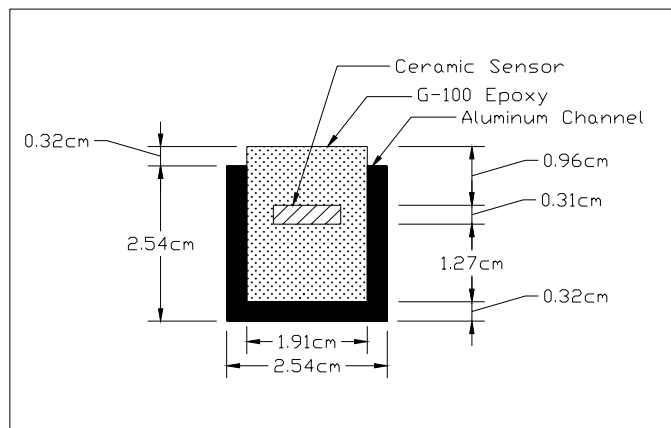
(c) Schematic of the cross section of sensor assembly in an aluminum channel.
